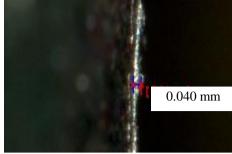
Smallest Burry dimension at material 0.6 mm
